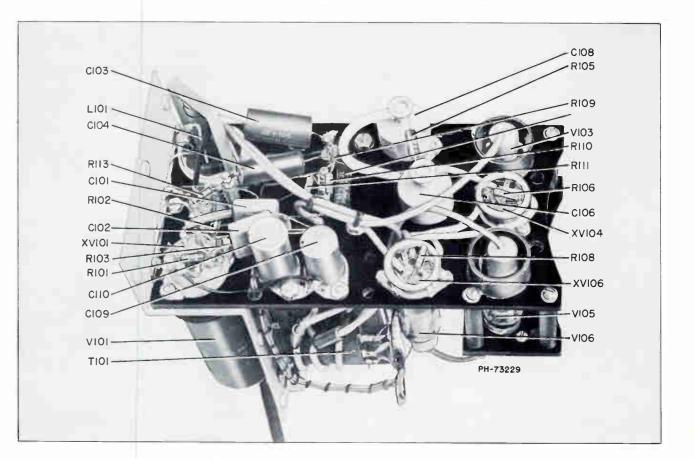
H-V Power Supply, Cover Removed, Bottom View
